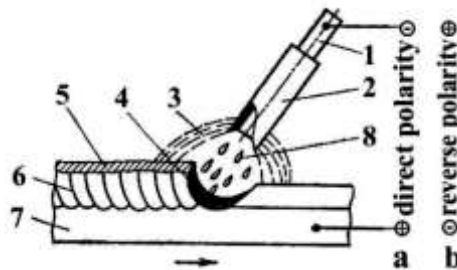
Direct (a) and reverse (b) polarity in welding process: 1 – core of electrode (wire); 2 – luting;
